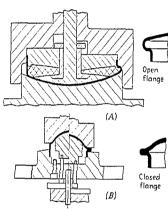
Dies for expanding flanges on cover shapes: (A) open-flange tool; (B) closed-flange tool. 4
